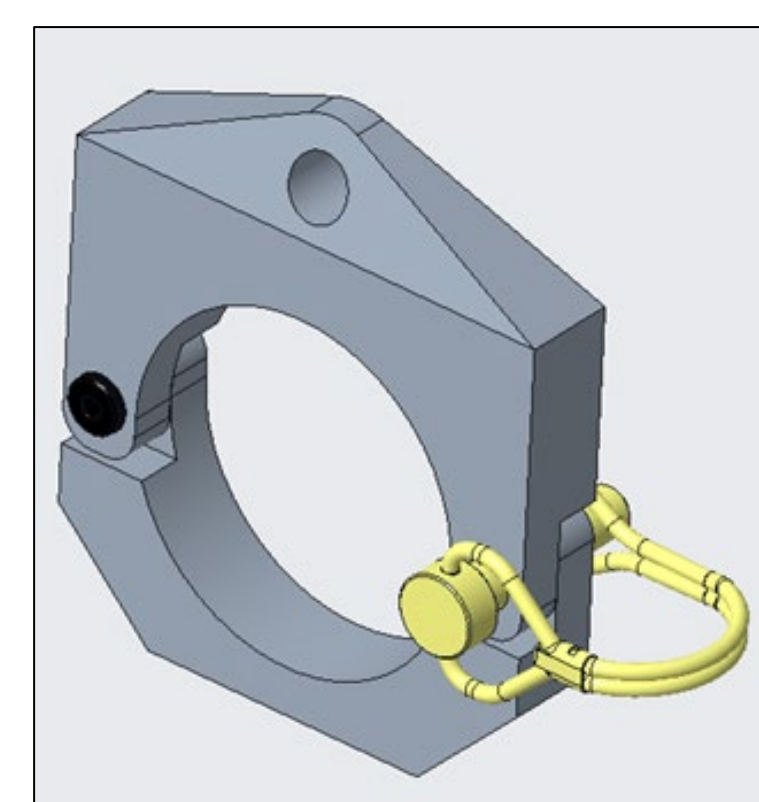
Model of locking collar with shoulder bolt and locking pin
